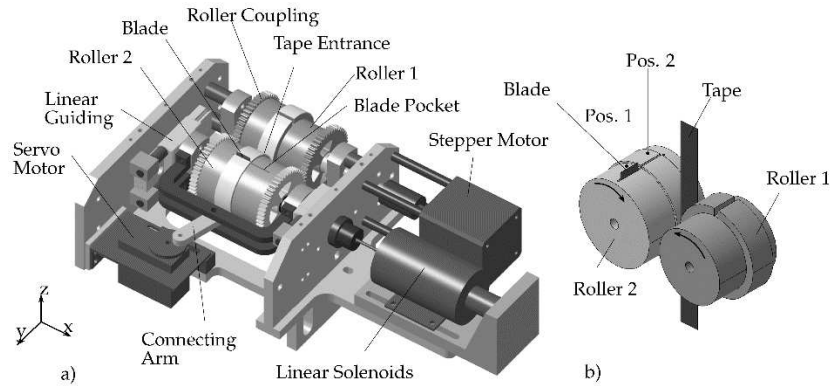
Integrated feed and cutting unit developed by Bahar et al [63].
